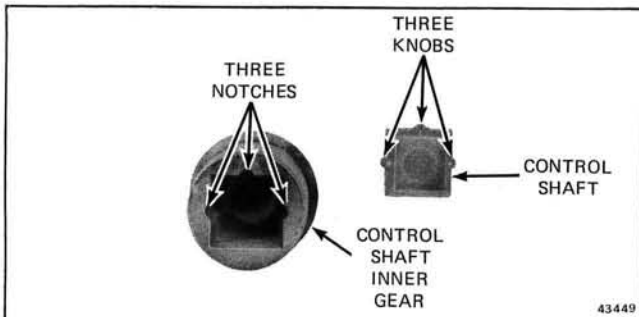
Aft Throttle Gear and Shaft Alignment
